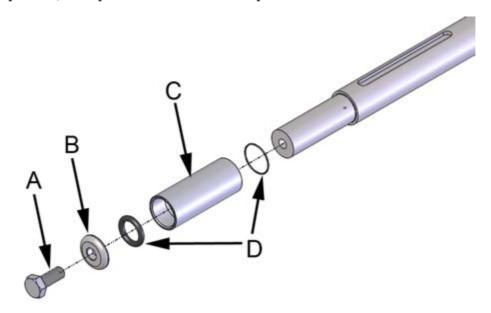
The shaft sleeve of a water-lubricated rear end bearing
